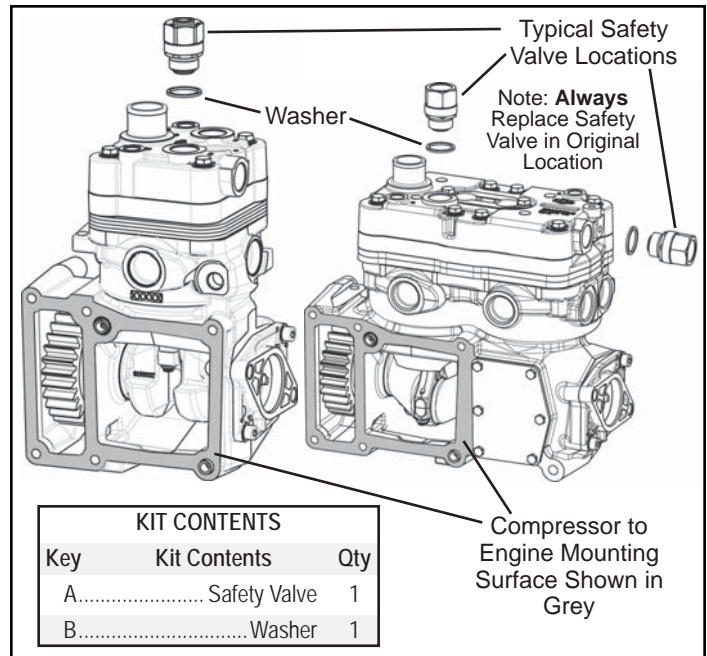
COMPRESSOR EXPLODED VIEWS
